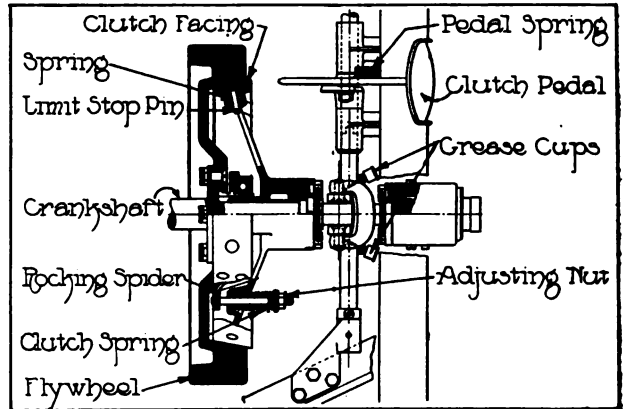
Components of Leather Faced Cone Type of Clutch, Actuating and Adjusting Mechanism.
